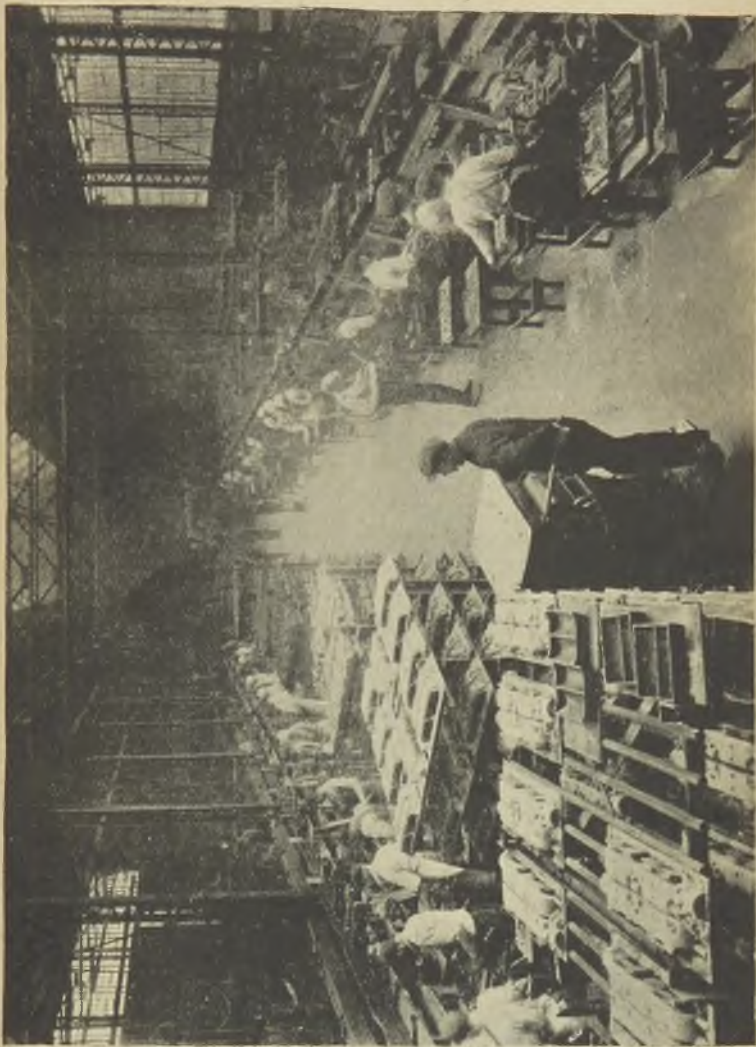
A VIEW OF A PRODUCTION CORE ROOM IN WHICH ALL CORES ARE MACHINE MOULDED.
